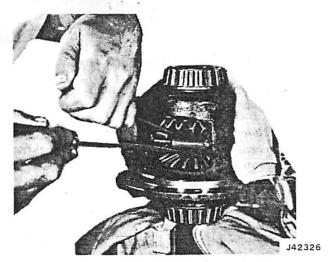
F-64 Pinion Mate Shaft Snap Ring Removal
